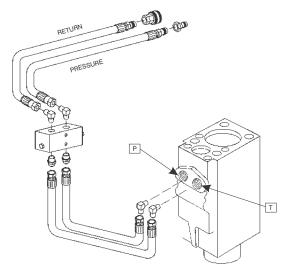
B. Connecting Hydraulic Lines Mini-Ex and Skid Steers (With Valves)
